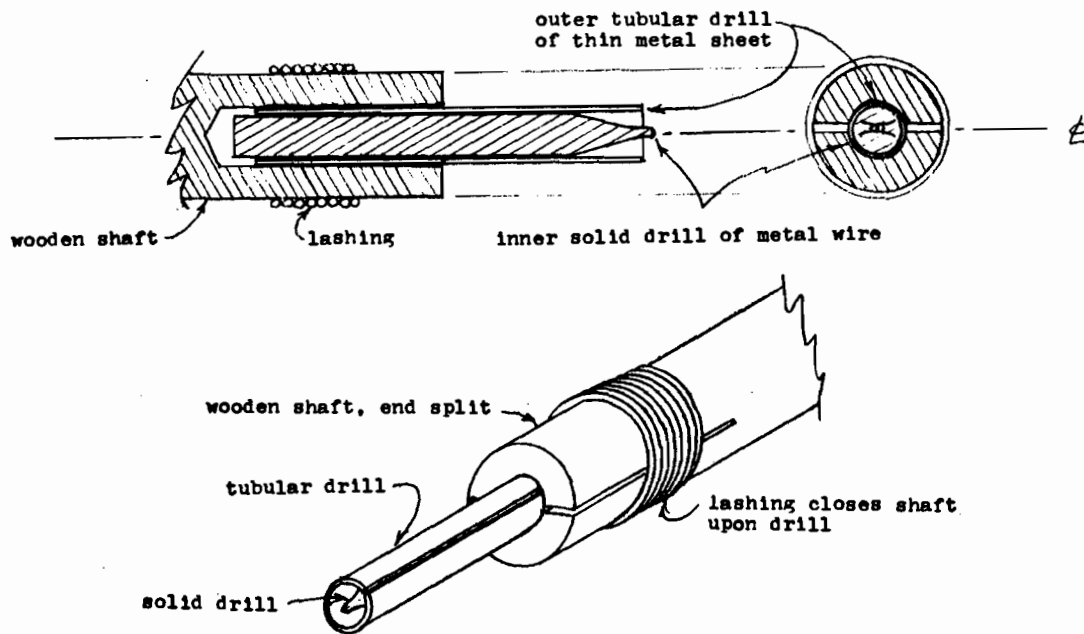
Suggested design of a composite drill with outer (tubular) and inner (solid) elements mounted coaxially.
